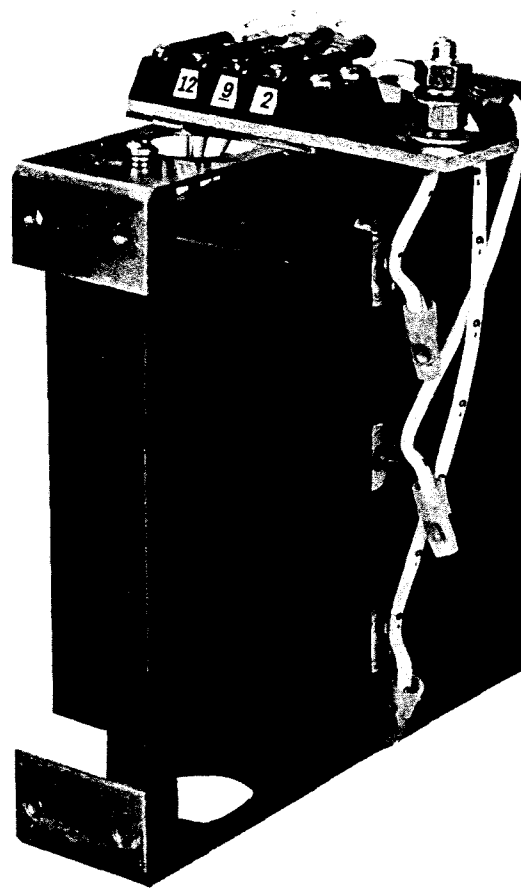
(BRIDGE MODULE SUB-ASSEMBLY. 1144)
